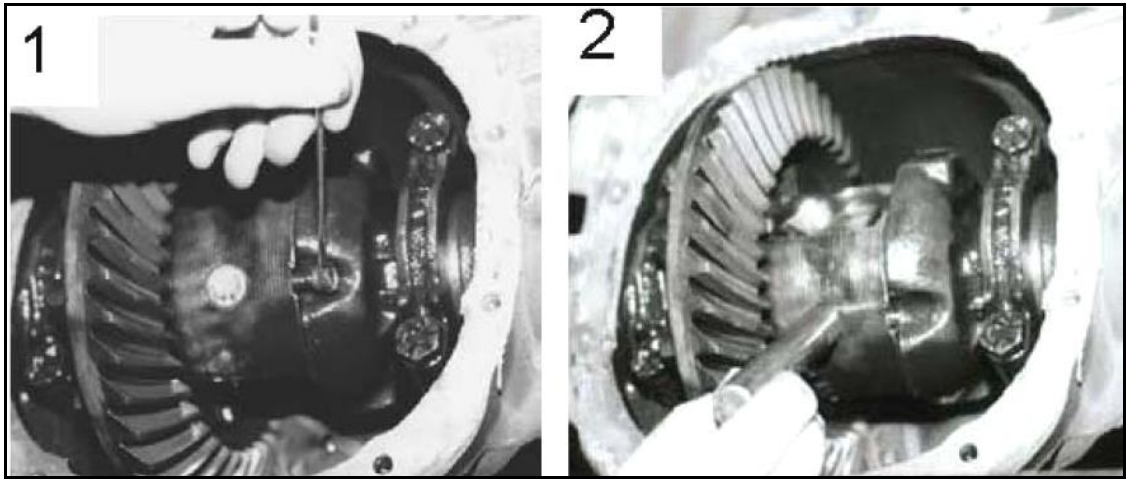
, 2: Removal of the differential pin lock bolt, Removal of the c-clips
